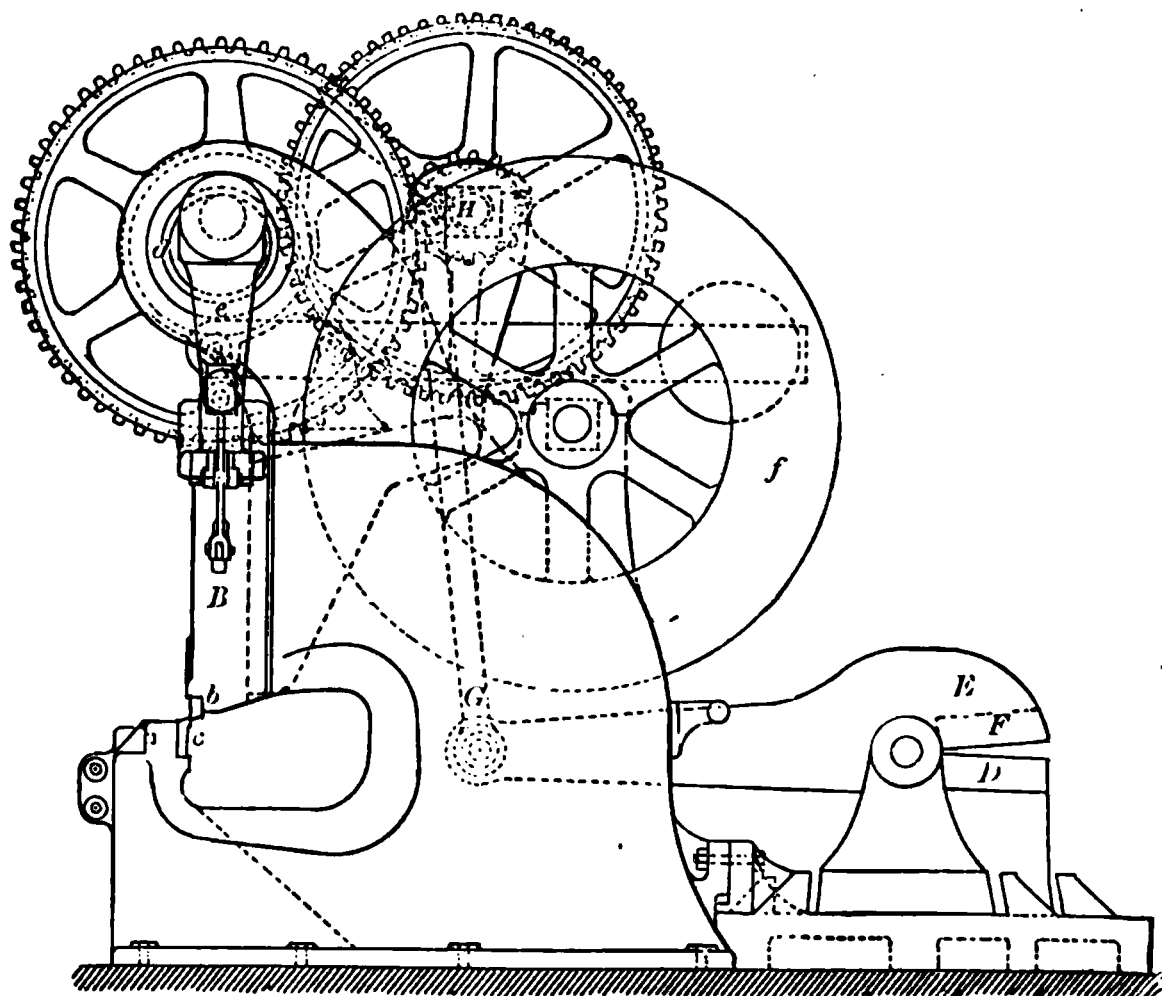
Plate Shearing Machine, with Crocodile Scrap Shears Attached, End Elevation.
